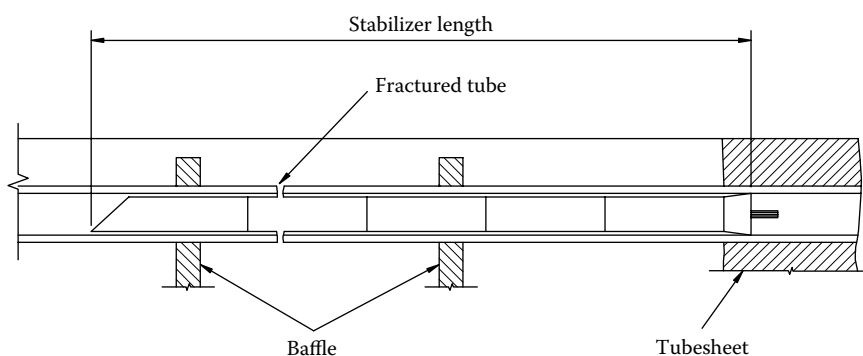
Plugging fractured tube using tube stabilizer.
